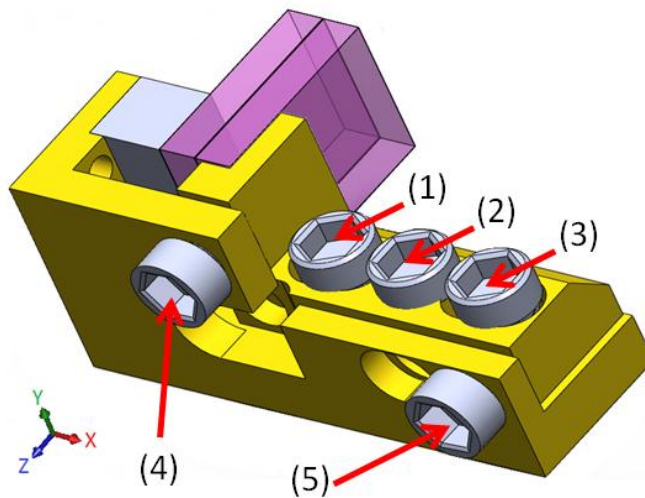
Screws for adjusting the parallelism of mirrors in the tunable filter.
